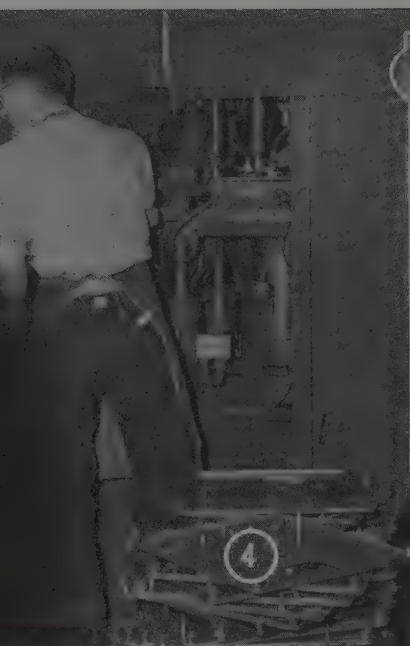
Operator on opposite side of machine from Fig. 2 places panel in position and actuates switch which initiates approach stroke and welding sequence. Entire assembly is completed in less than 20 sec
